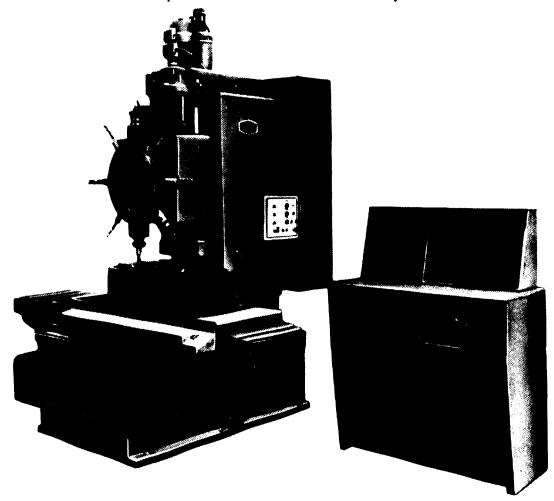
Figure III. Numerically controlled boring and drilling machine, using punched tape. These machines require only positioning (point-to-point) controls
